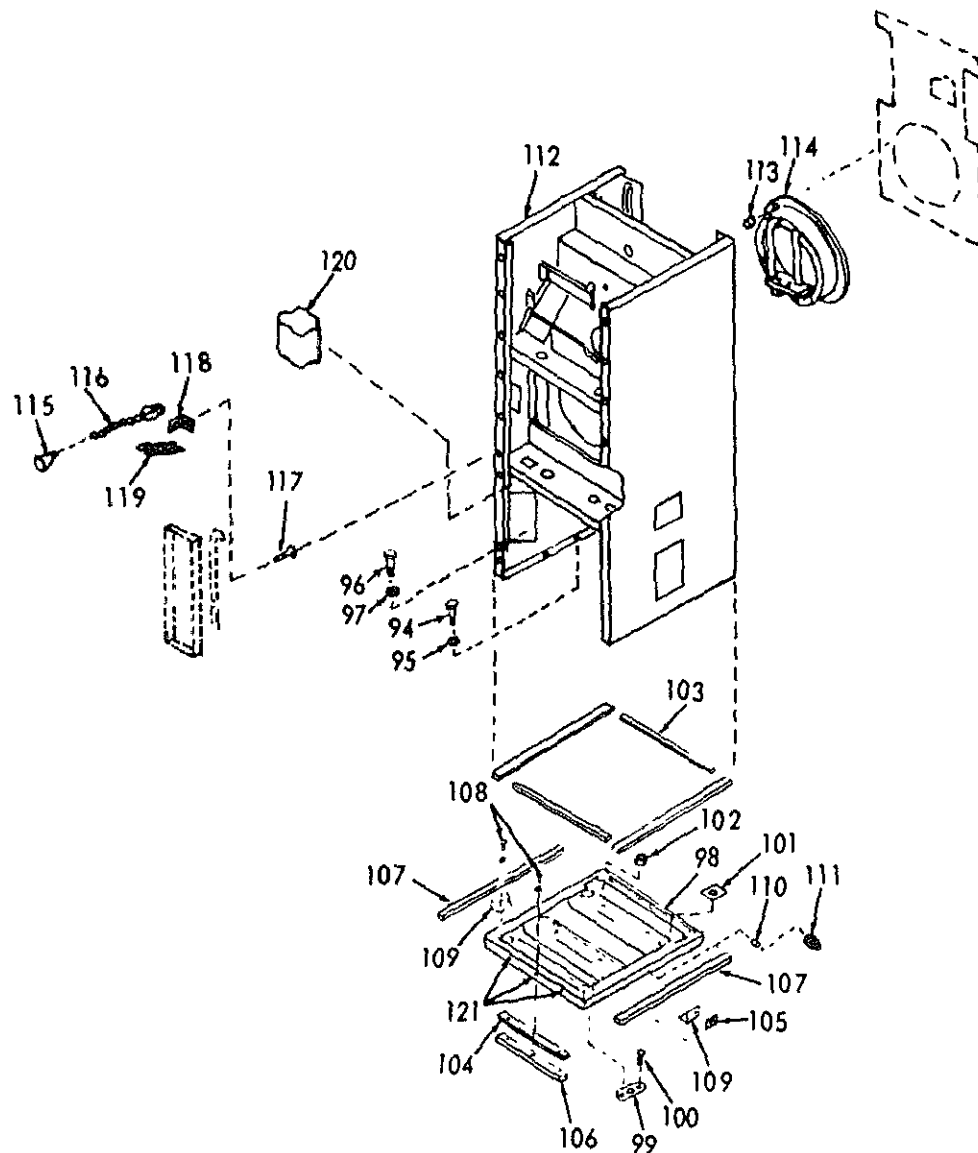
Casing, Panels, Grilles, Filter and Drain Tubes
